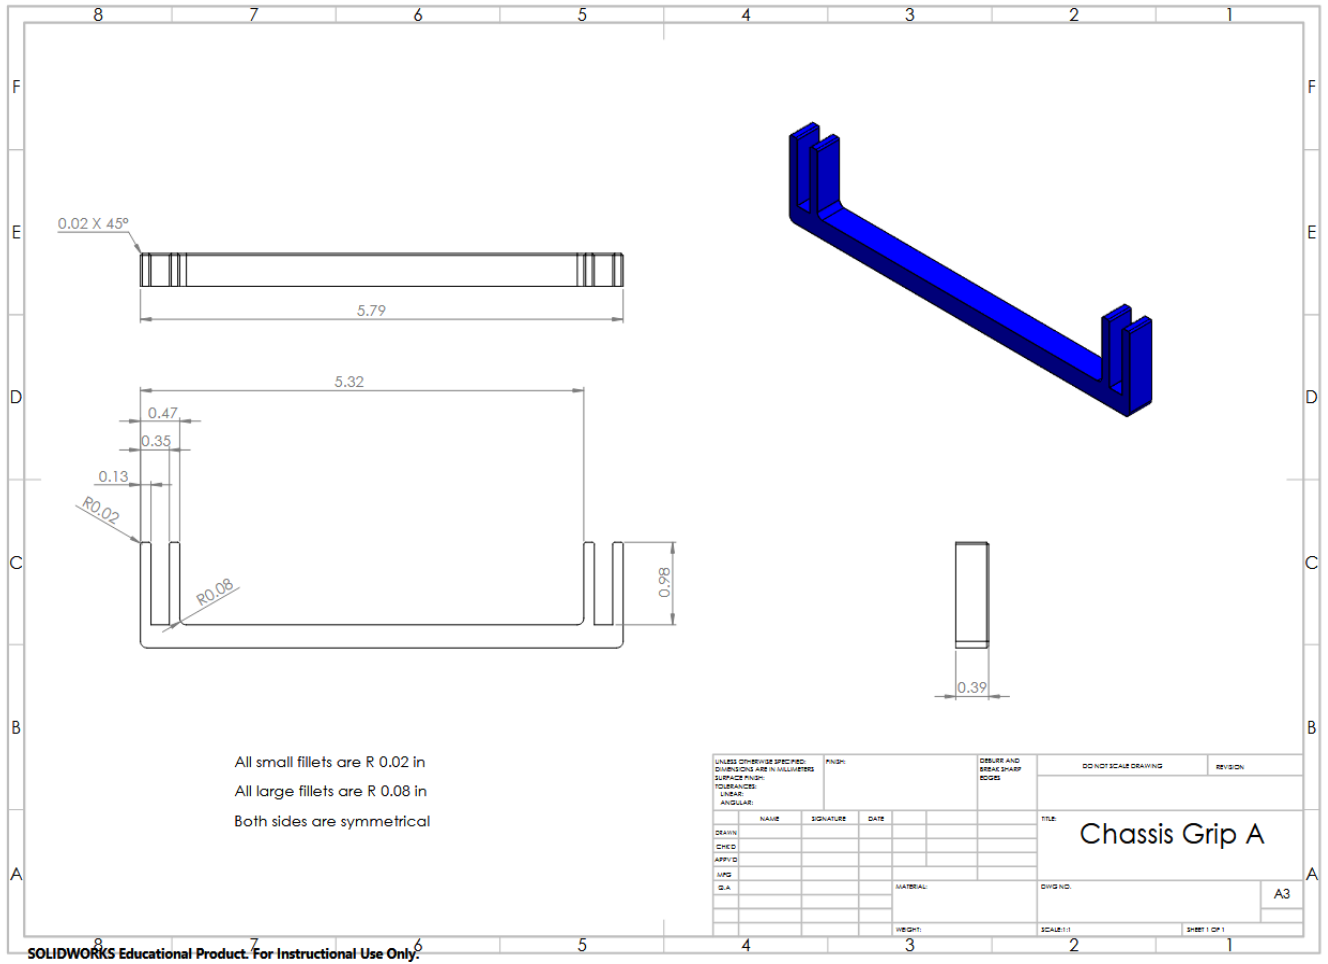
SolidWorks Drawing of Chassis Grip A (3D Printed)
